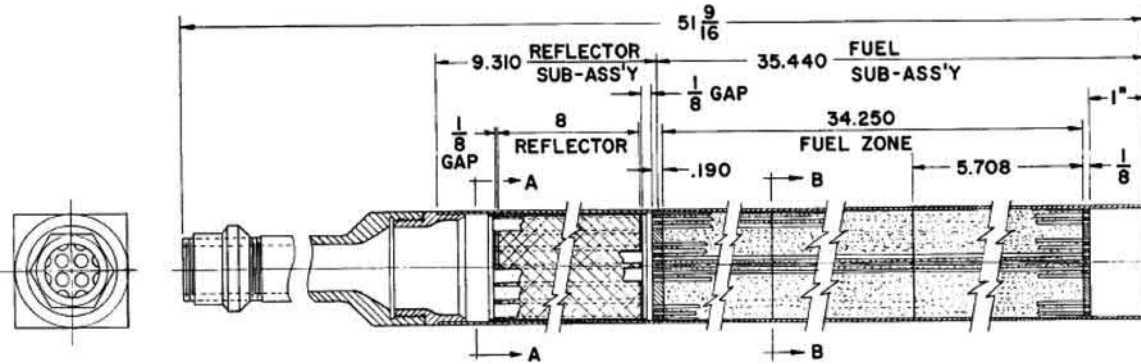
Design drawing of cermet NTR fuel element (dimensions in inches).
